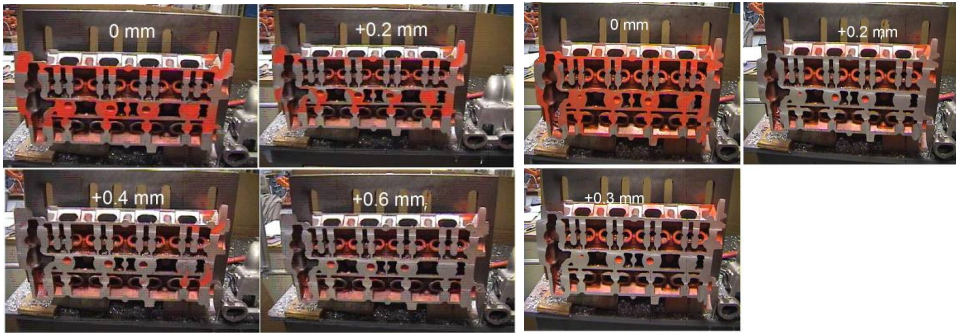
A. Cylinder head part, surface error of end milling in position control; B. Cylinder head part, surface error of end milling in force control
